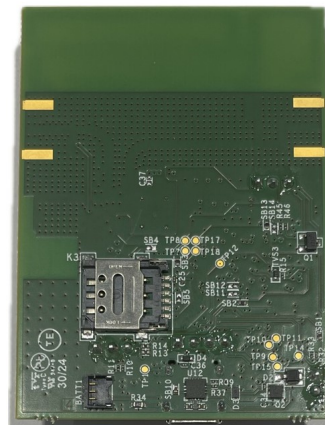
STEVAL-NBIOT PCB bottom view [39]
